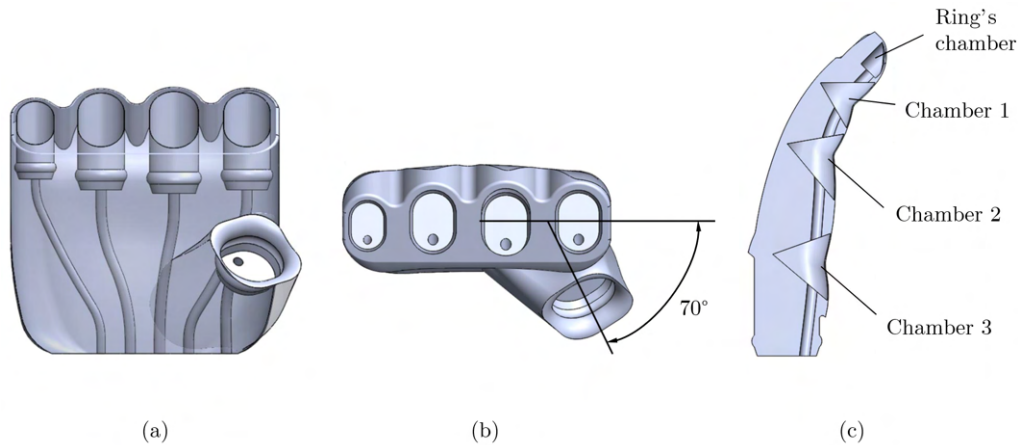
Design details of the components of the body-powered hand prosthesis developed by F. Pinheiro [62]: (a) anterior view of the hand body; (b) top view of the hand body; (c) inner design of the finger.
